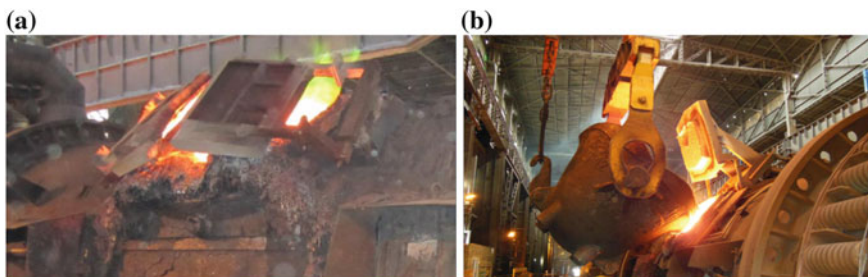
Refining furnaces (a) old manhole covers (b) new manhole covers
